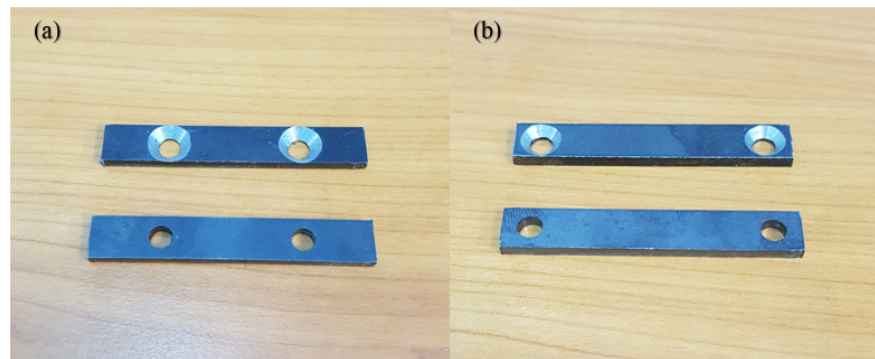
Steel fixing plates with bolt hole separation of a) 32 mm b) 52 mm.
